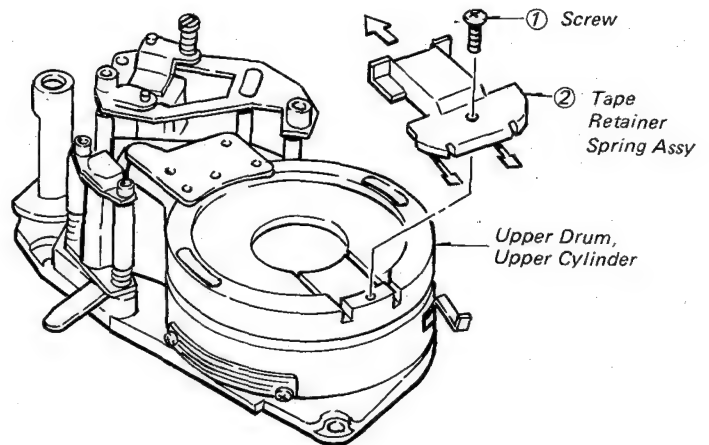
Tape Retainer Spring Assembly Replacement.
